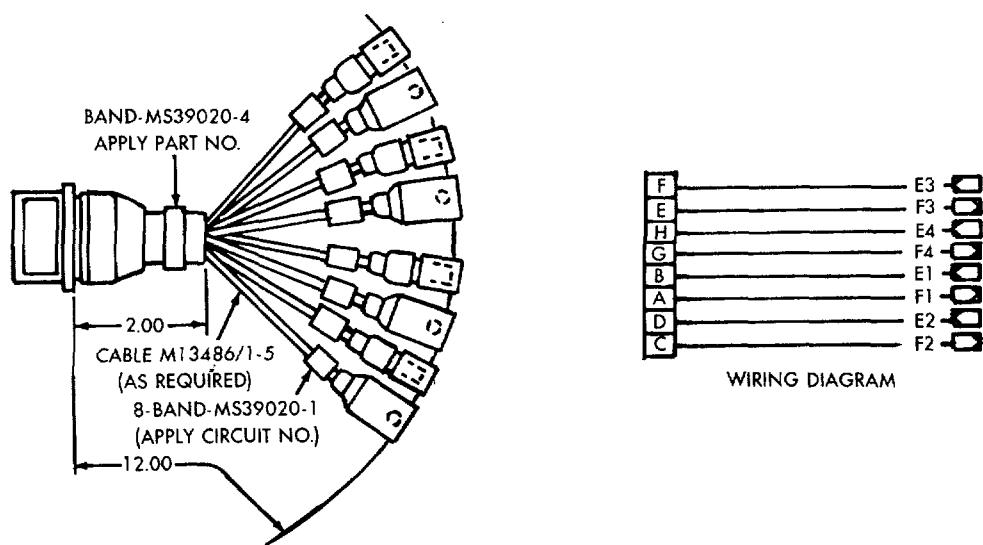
Outrigger Control Panel Box Wiring Harness Assembly.
